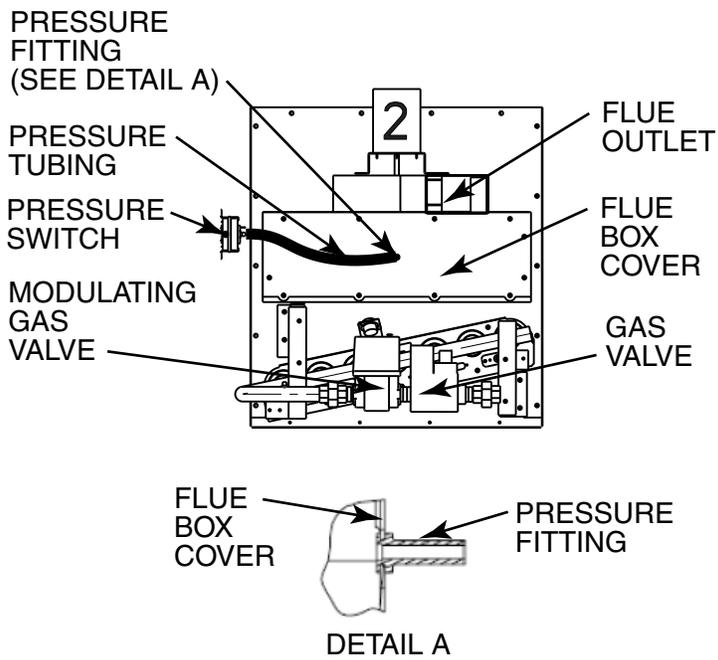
Gas Section Detail, Modulating Gas Heat
